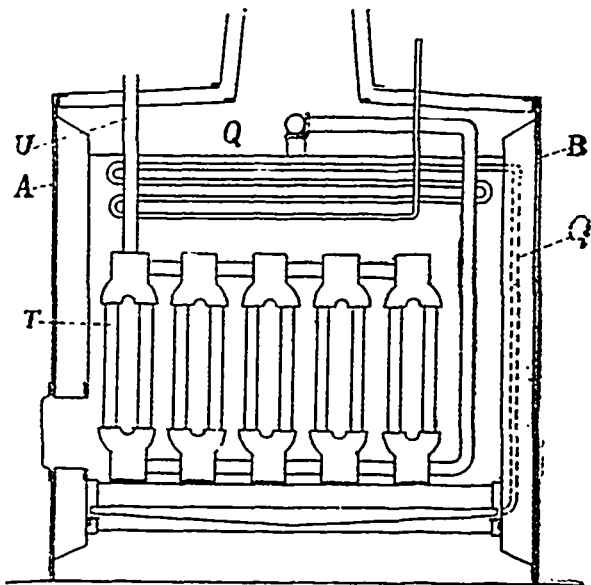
Side elevation Finlayson Boiler, showing particularly the arrangement of super-heating coil (T), its connection with steam-drum, and out-flow through engine supply pipe U. A super-heating coil lies on either side of furnace.
